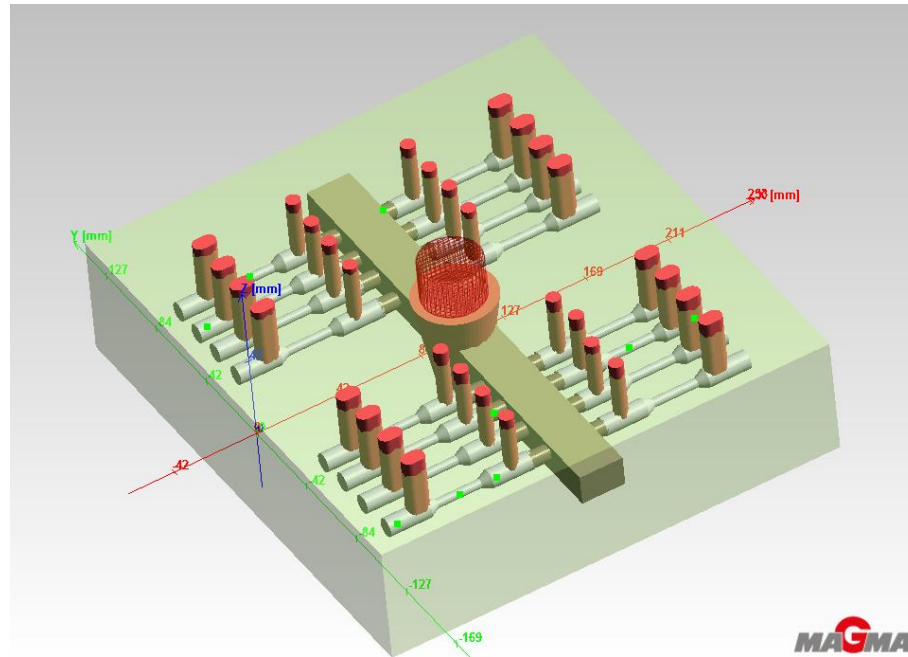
Casting System CAD model in MAGMA⁵ geometry Interface
